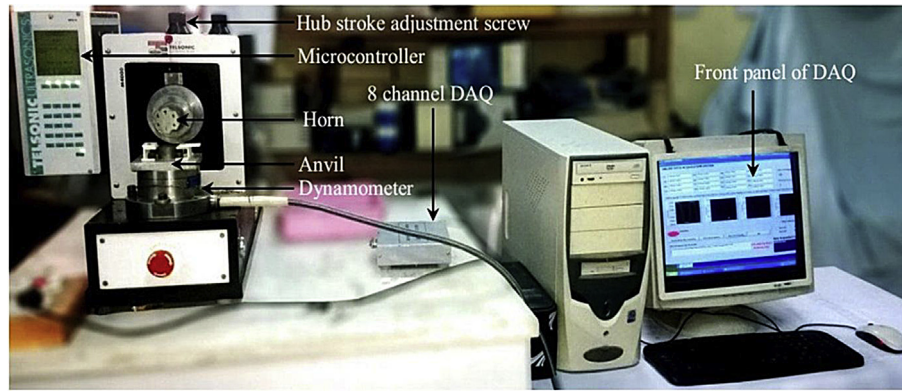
Ultrasonic metal welding machine setup with DAQ.
